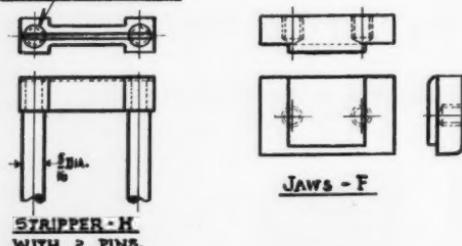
Drawing of the bending Jaws F and the stripper H as machined to suit the requirements of the two-place bender shown in Fig. 7.
